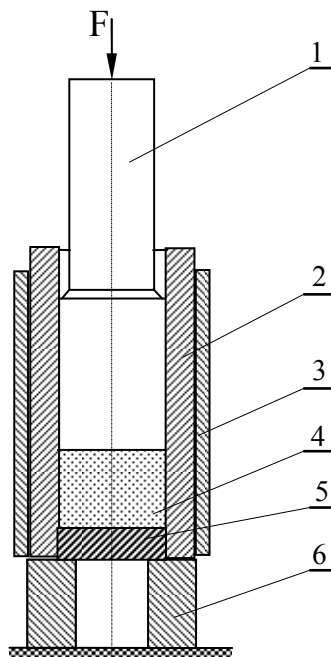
Scheme of the compression assembly: 1 – piston, 2 – cylinder, 3 – heating coat, 4 – compressed medium, 5 – bottom disk or ring (die), 6 – bottom stand
